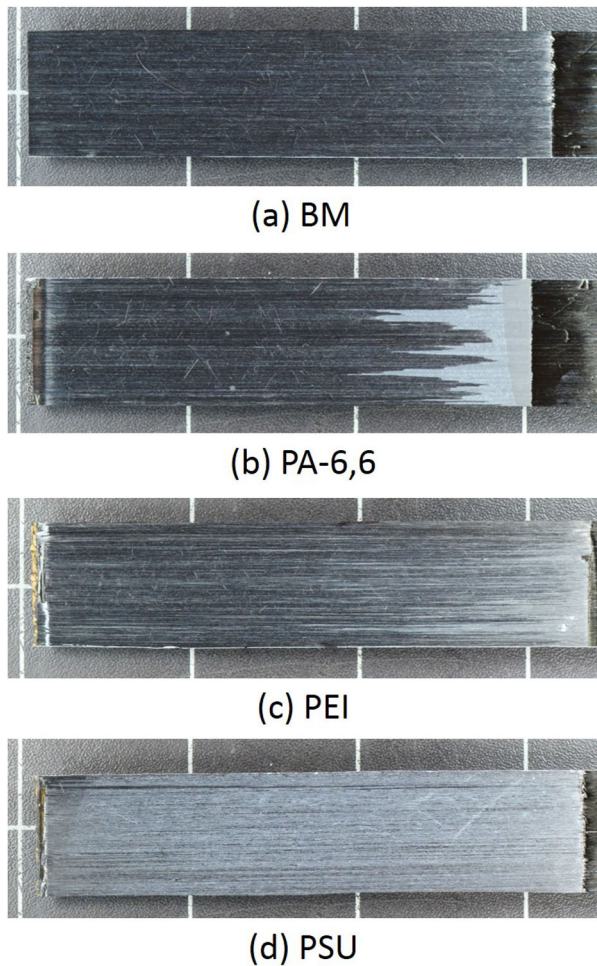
Photographs of the fracture surfaces of representative samples for each reinforcement type.
